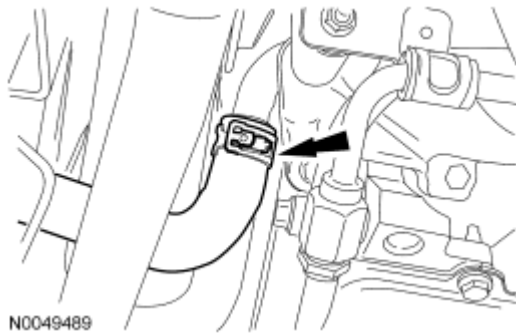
Disconnecting Coolant Hose From Oil Cooler
